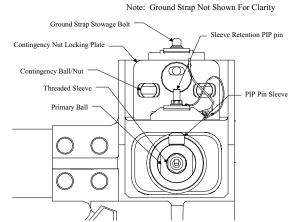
P6 Fine Alignment/Nut Installation Rear View
